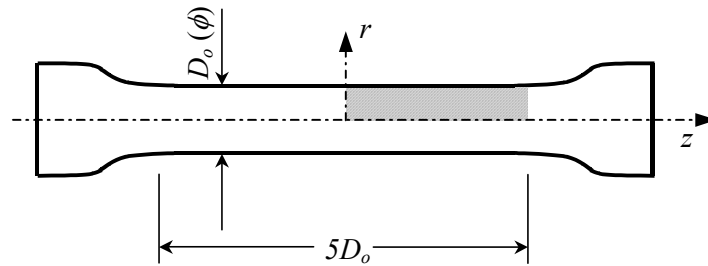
Cylindrical tensile specimen.
